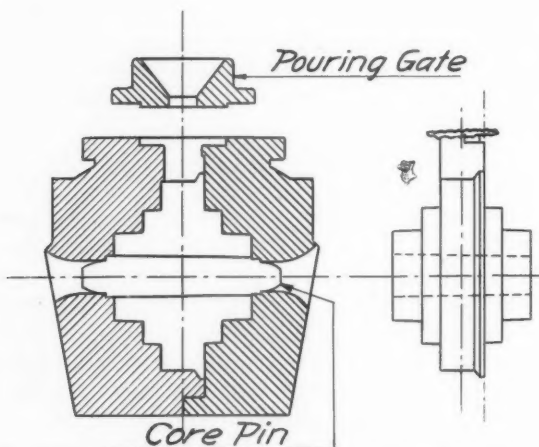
CROSS SECTION OF MOLD AND SKETCH OF CASTING.
